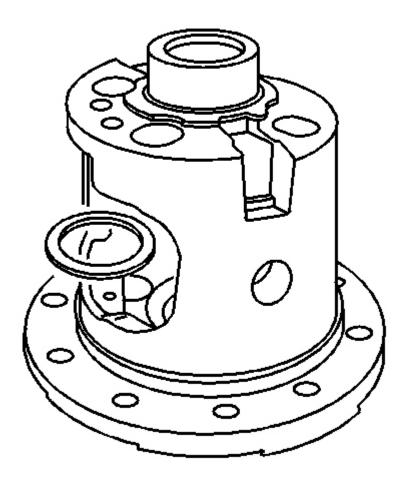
View Of Left Side Gear Thrust Washer Courtesy of GENERAL MOTORS CORP.
